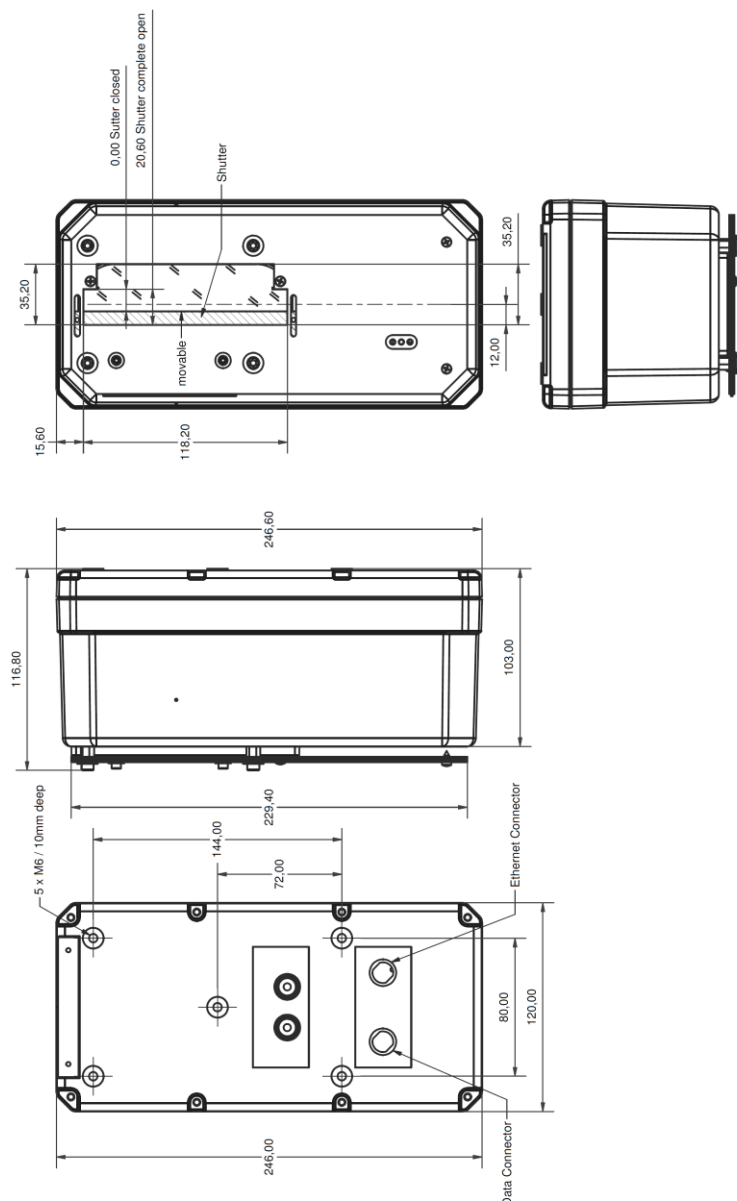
PS HT Laser Scanner Laser Scanner outlines (no scale)
